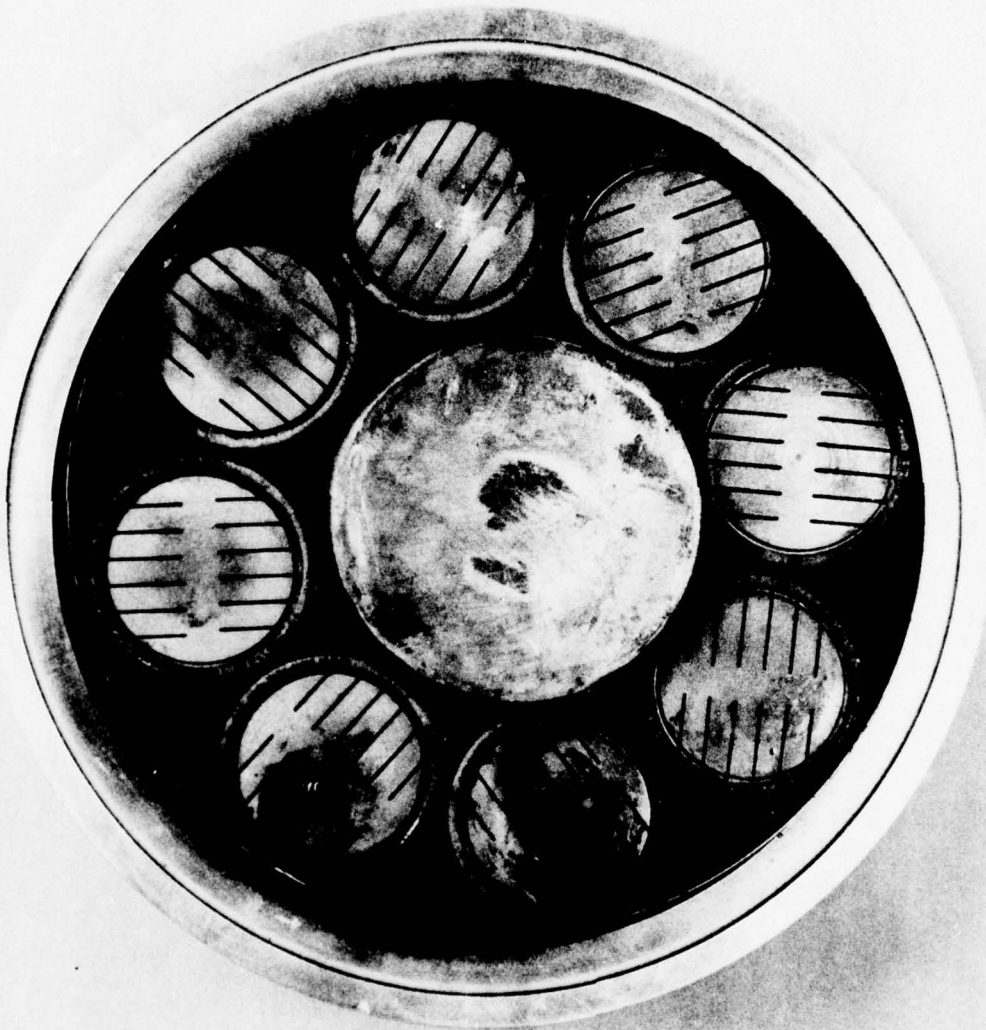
Hydrazine Fueled Starter Cartridge Gas Generator Assembly
